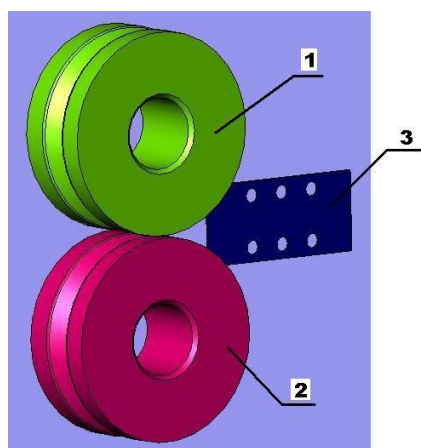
The roll tool for manufacturing the V-figurative section: 1 - upper roll; 2 - lower roll; 3 - blank with holes
